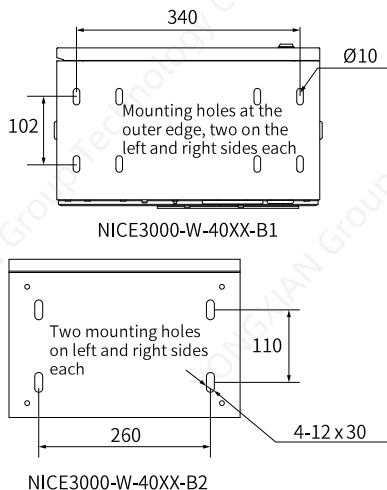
Locations and dimensions of the mounting holes at the bottom of the MRL control cabinet (Unit: mm)
